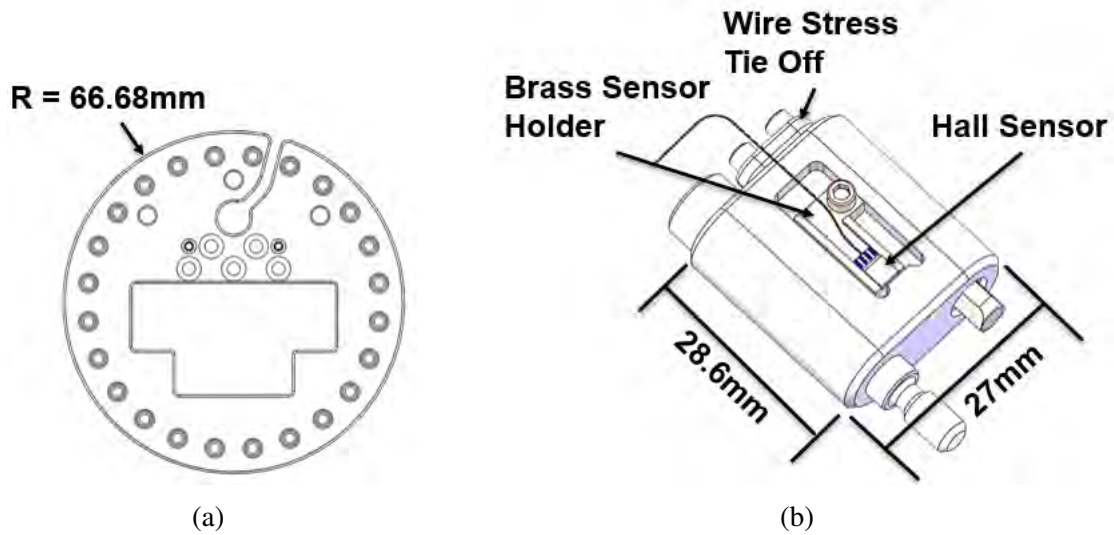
a) Circular flange which allow for mounting of the sensor holders to form the full sensor array for mapping. b) Model of the sensor holder which mates to the sensor ring.
